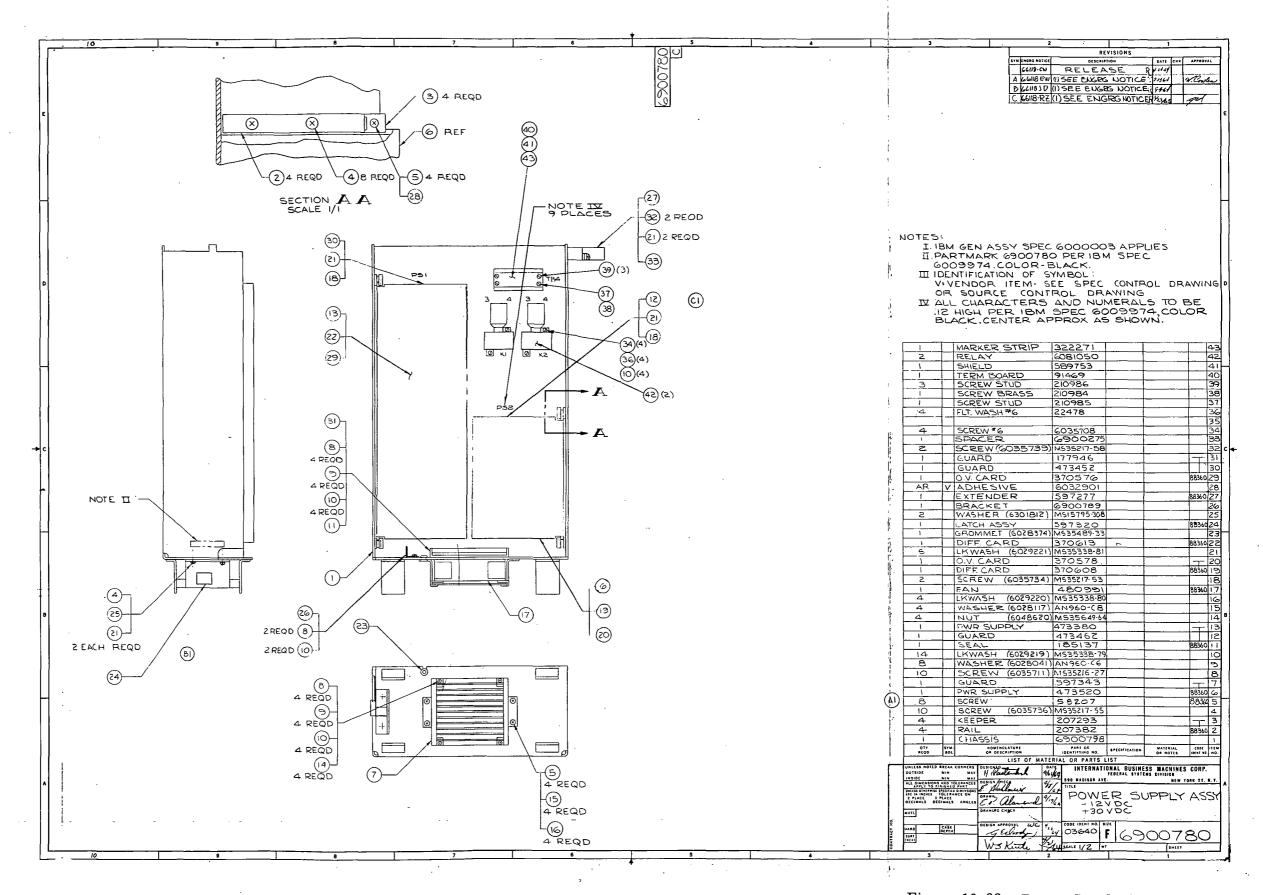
Power Supply Assembly (01B8) Assembly Drawing
